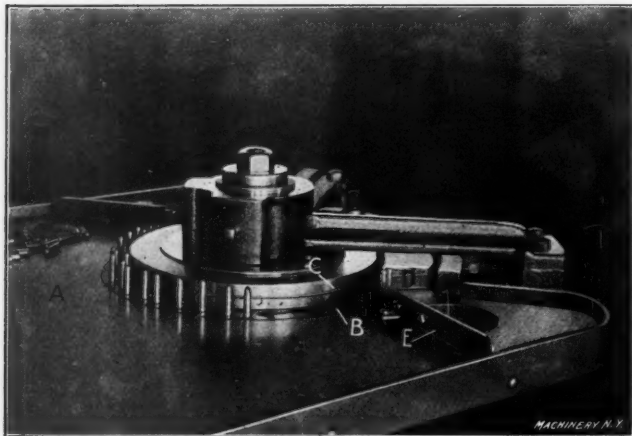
Canneluring Machine for Forming the Grooves in the Bullet
